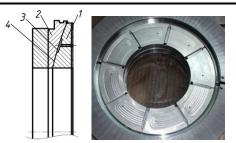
PUDSK annular thrust damper bearing with a spherical thrust on a fluid pivot:
